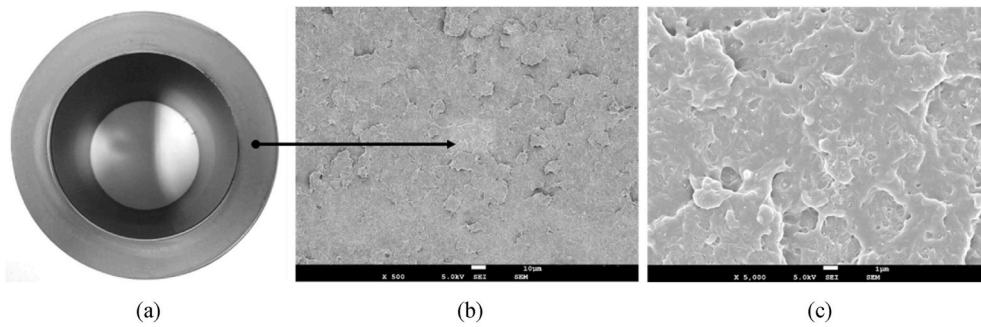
Fracture surface of CF specimen after HAT test. (a) Pipe cross-section, (b) $\times 500$ and (c) $\times 5000$.
